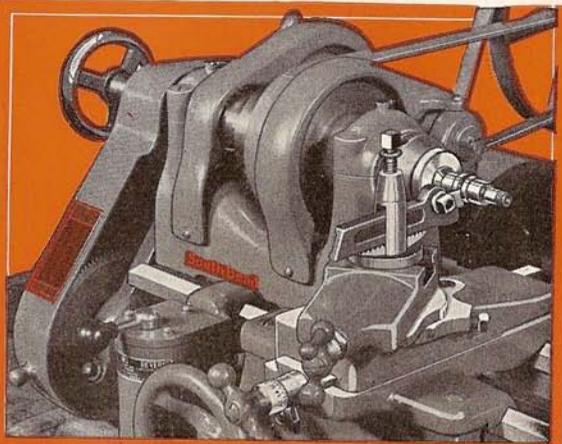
Machining Small Parts Held in Draw-in Chuck
